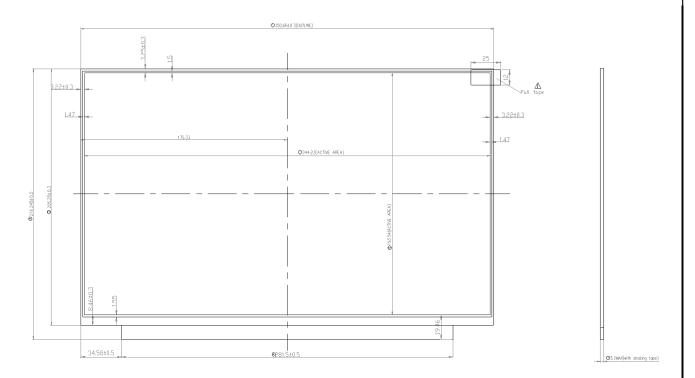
TFT-LCD Module Outline Dimension (Front View)
